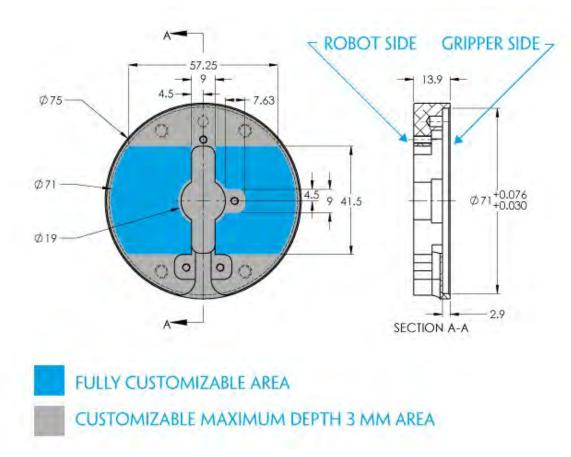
Blank coupling AGC-CPL-BLANK-002 workable area dimensions.
